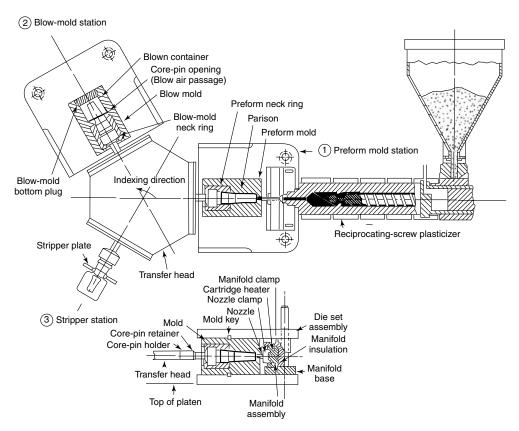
A typical three-station injection blow-molding machine. Courtesy of Rainville Operation, Hoover Universal, Inc.
